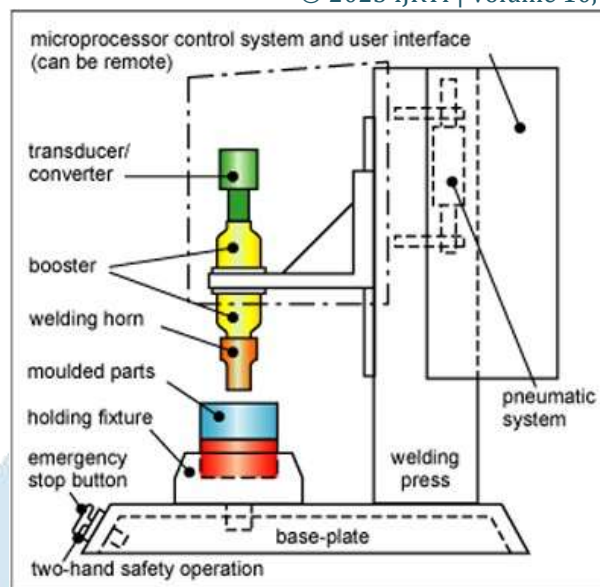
Ultrasonic Welding Machine Used for Testing
